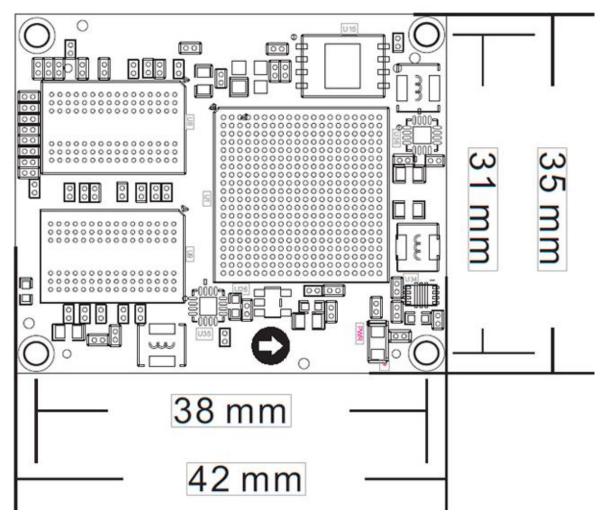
AC7Z010 Core Board Size Dimension
